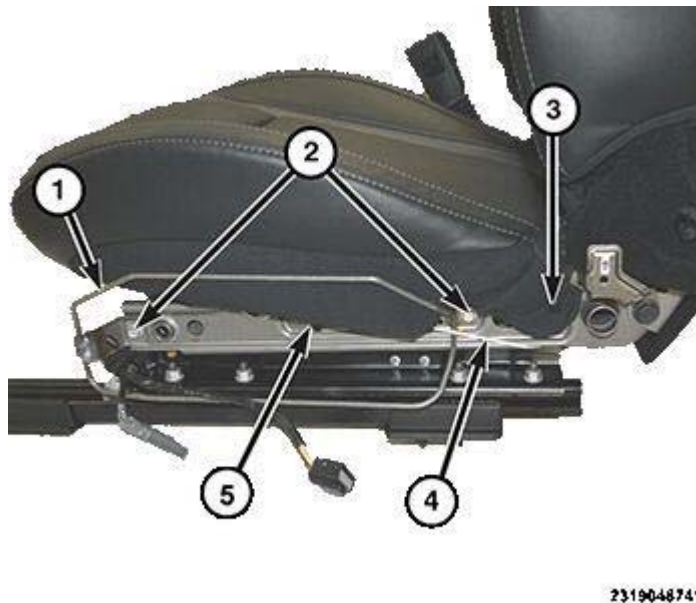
Side Bracket, String, Fastener, Retainer & Bolts
